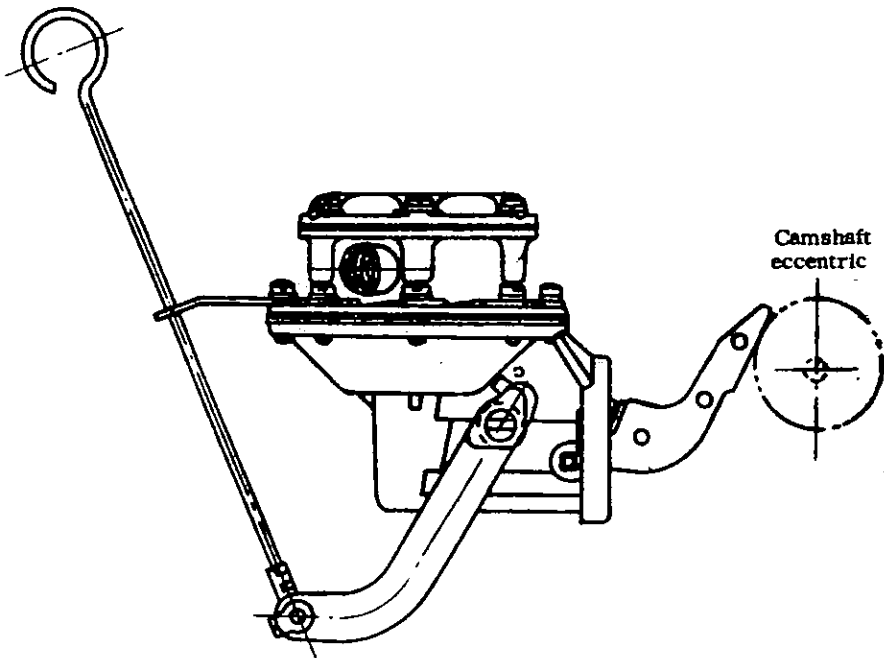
Construction of Fuel Pump and Measurement of Rocker Arm Wear
